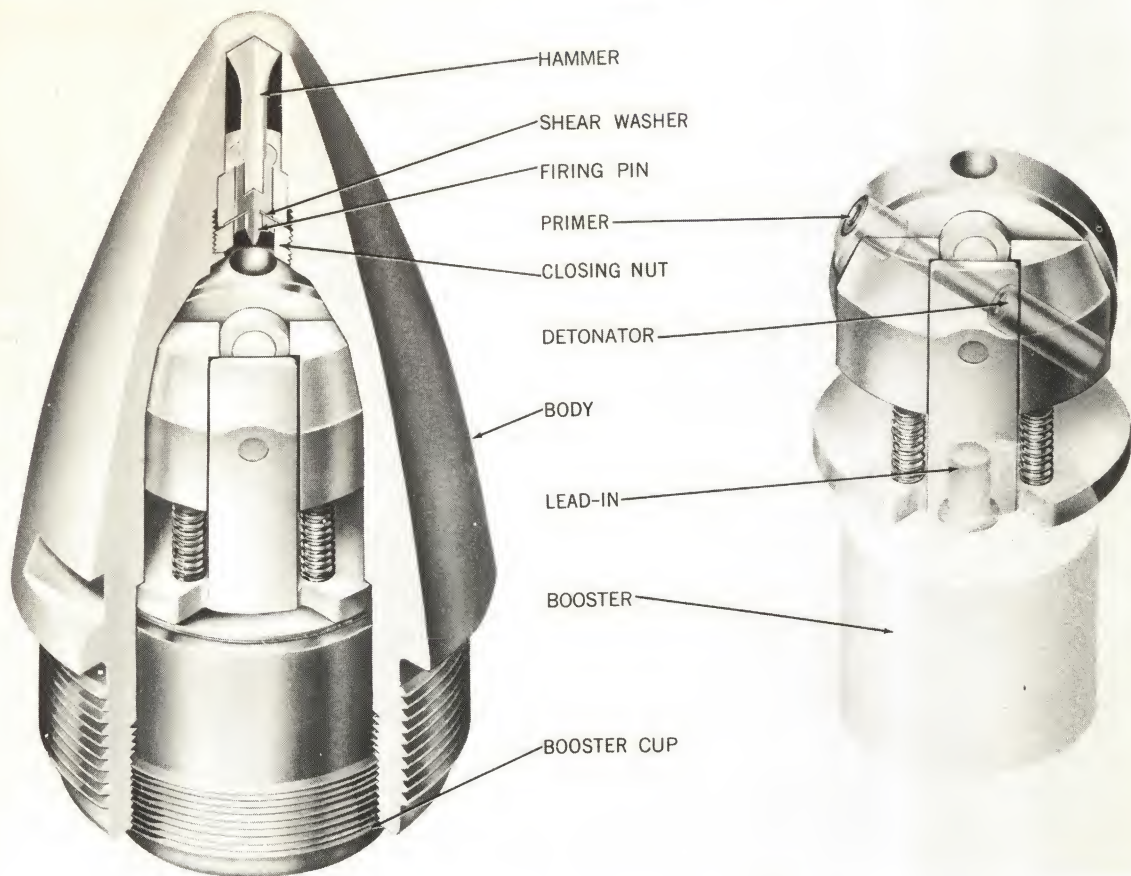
Typical Acceleration-Arming, Point-Detonating Nose Fuze in Unarmed Position: Cutaway View (left); Explosive Components in Unarmed Position, Phantom View (right).
